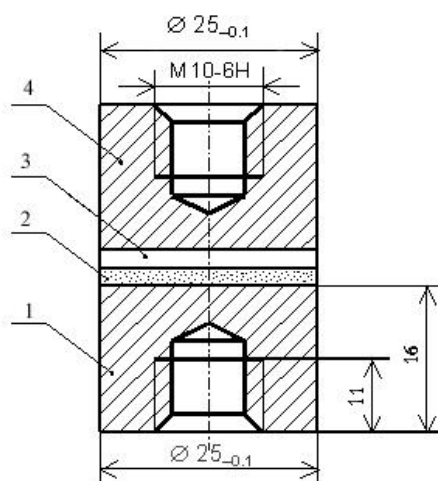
Test scheme: 1 - sample, 2 - coating, 3 - adhesive layer, 4 - counter-sample.
